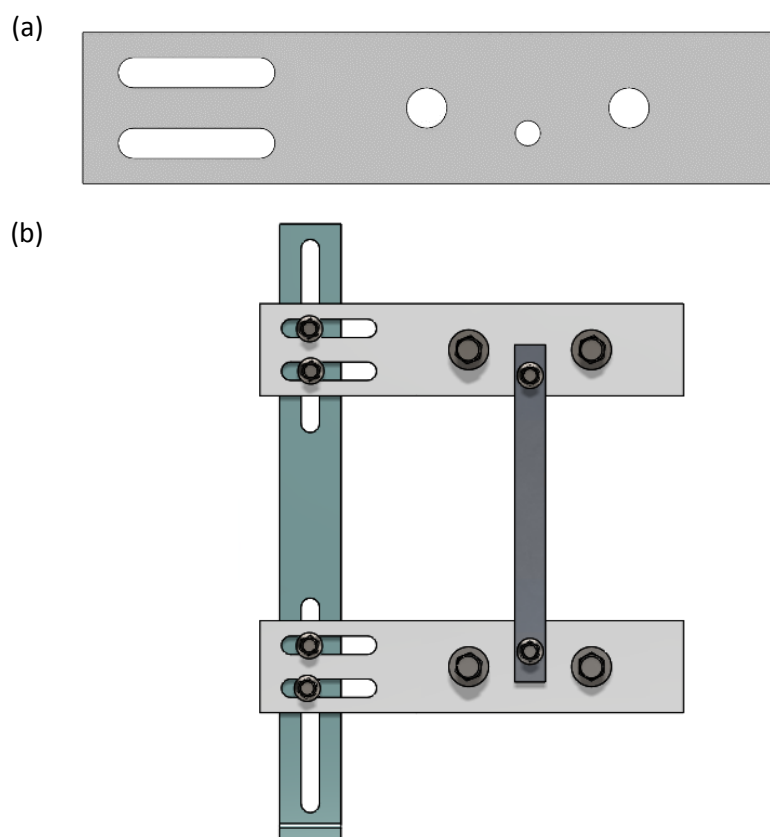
Improved version of workpiece support: (a) workpiece holders; (b) assembled with workpiece.
